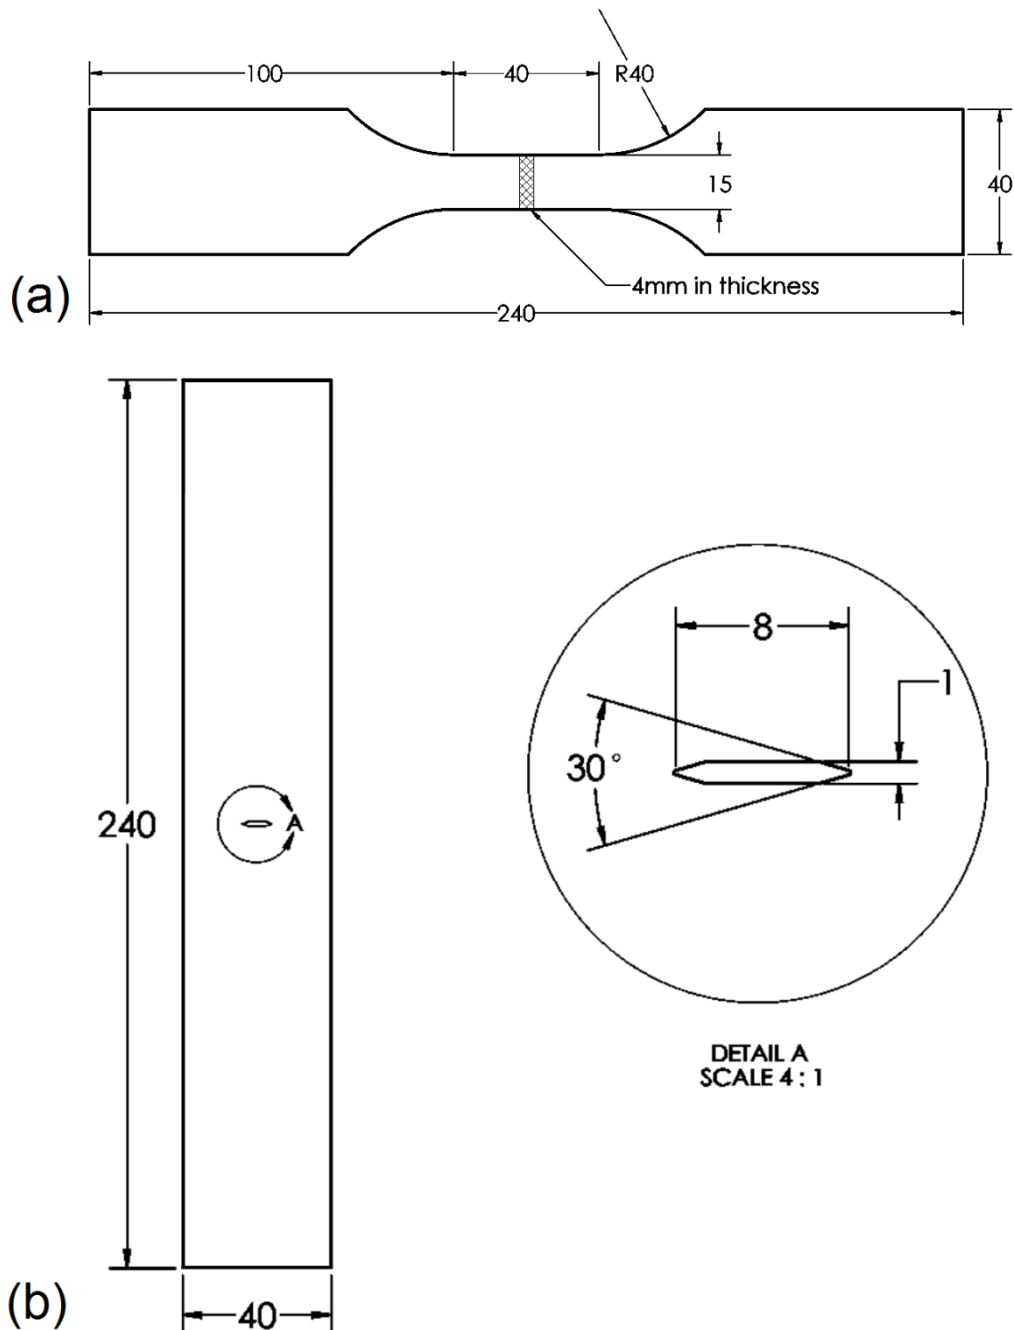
Specimen dimensions for fatigue testing (a) Dog-bone specimen and (b) Middle tension specimen
